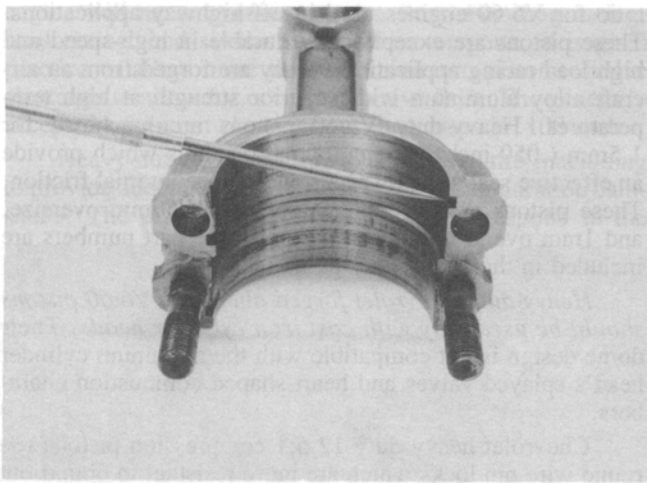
Machine new bearing tang groove in modified small-block V8 rod to center bearing insert on rod journal.
